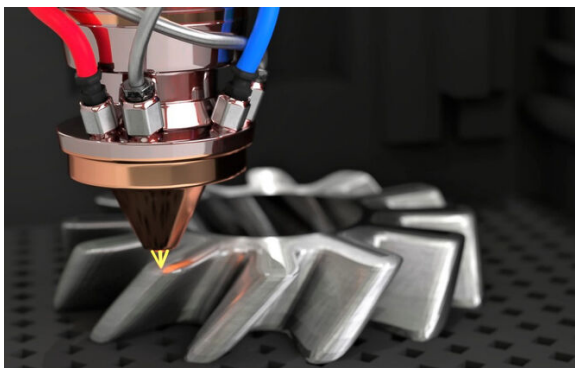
A 3D-printed metal gear, adapted from [www.metaltechnews.com](http://www.metaltechnews.com)
